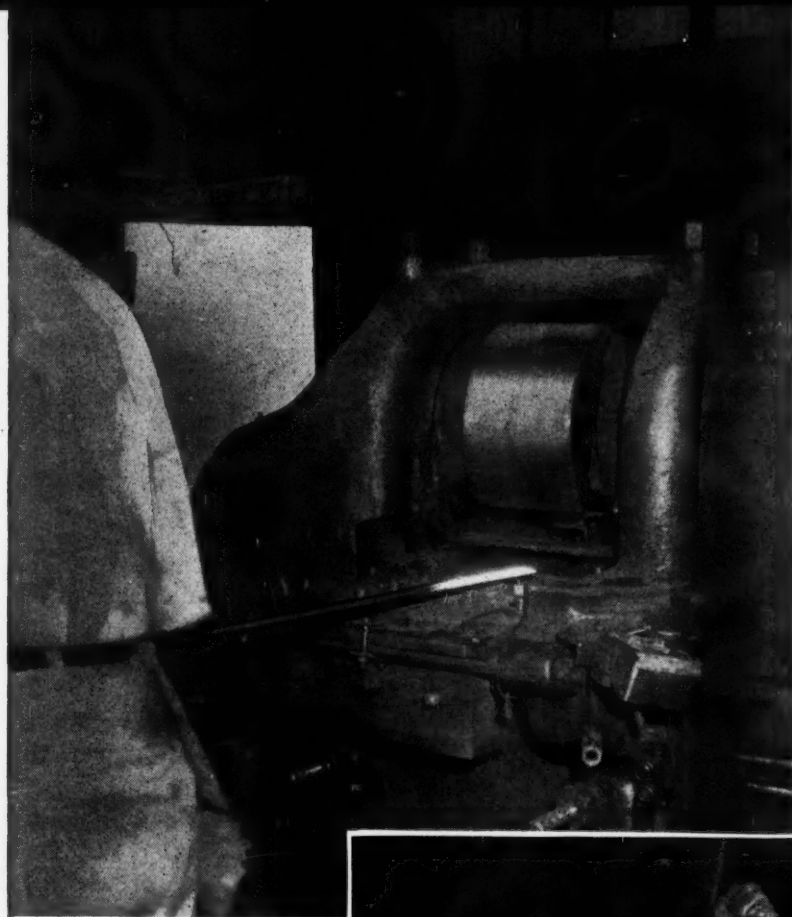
(Left) To Form a Flat Seat on the End of Hot-coiled Automotive Suspension Springs, the End of the Bar is Tapered by Forging between the Eccentric Rolls of This Machine
